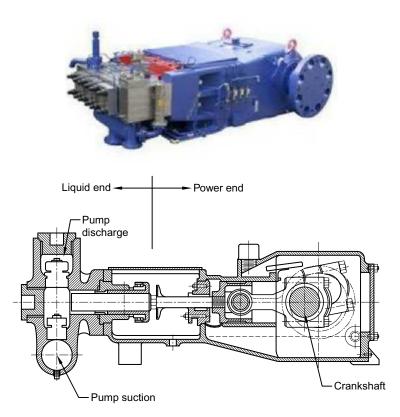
Reciprocating plunger power pump. Top: assembled and Bottom: sectional. Courtesy of Worthington a Division of Ingersoll Dress Company.
